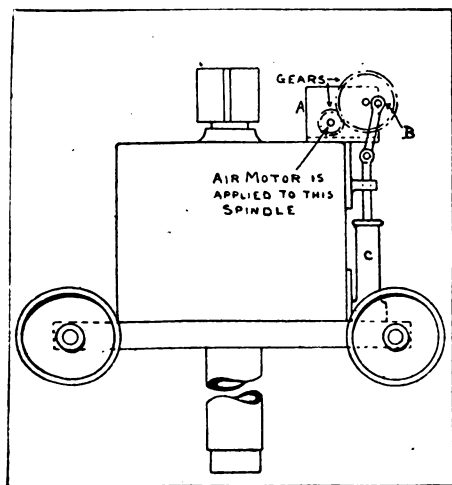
Air Operated Hydraulic Drop Pit Jack.
